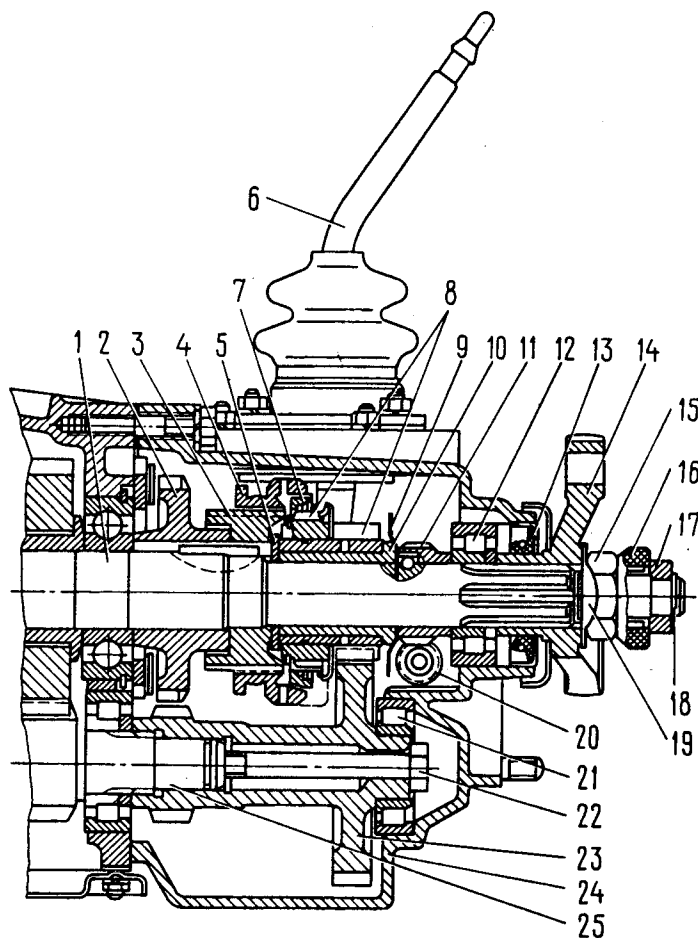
Rear Part of Five-Speed Gearbox:
